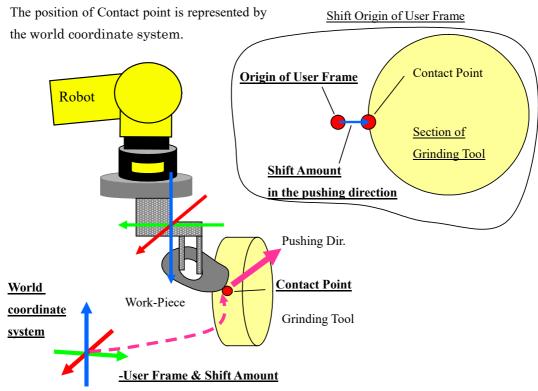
(i) Example 2 of setting USER to "3-Axis FS ContactP. Position"
